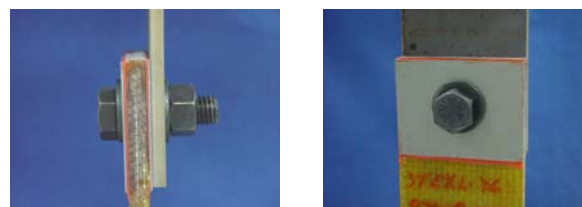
The 3D composite/steel lap shear joint assembly with adhesively bonded steel plates.
